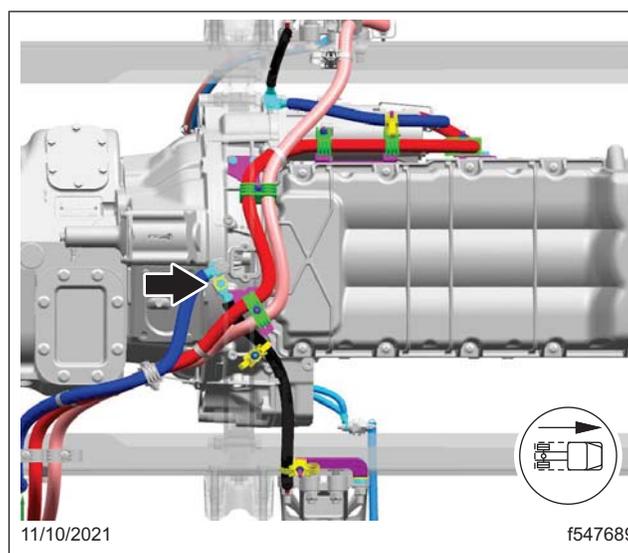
, Aluminum Battery Cable Bolt at the Flywheel Housing
